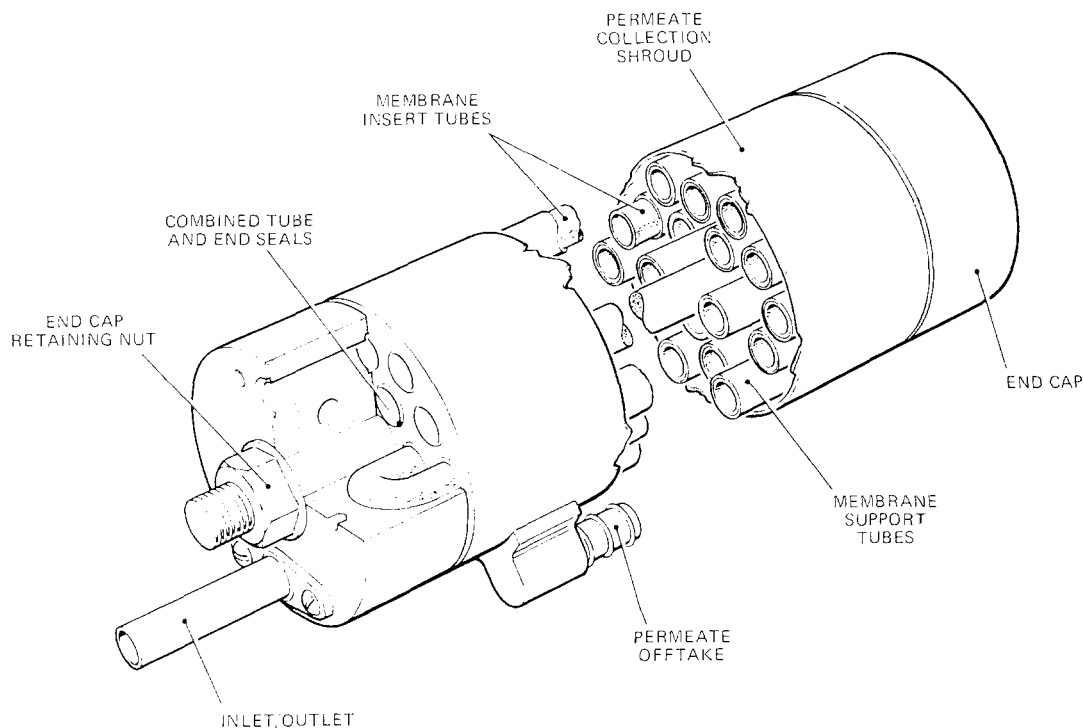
EXPLODED VIEW OF THE B1 MODULE
